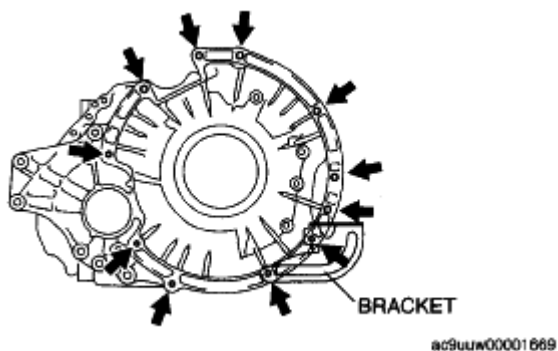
Locating Transaxle Mounting Bolts & Bracket
